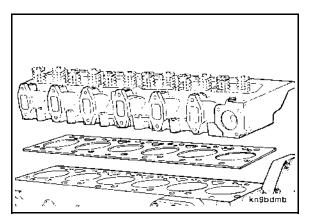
REMOVE THE CYLINDER HEAD AND GASKET CLEAN AND INSPECT
